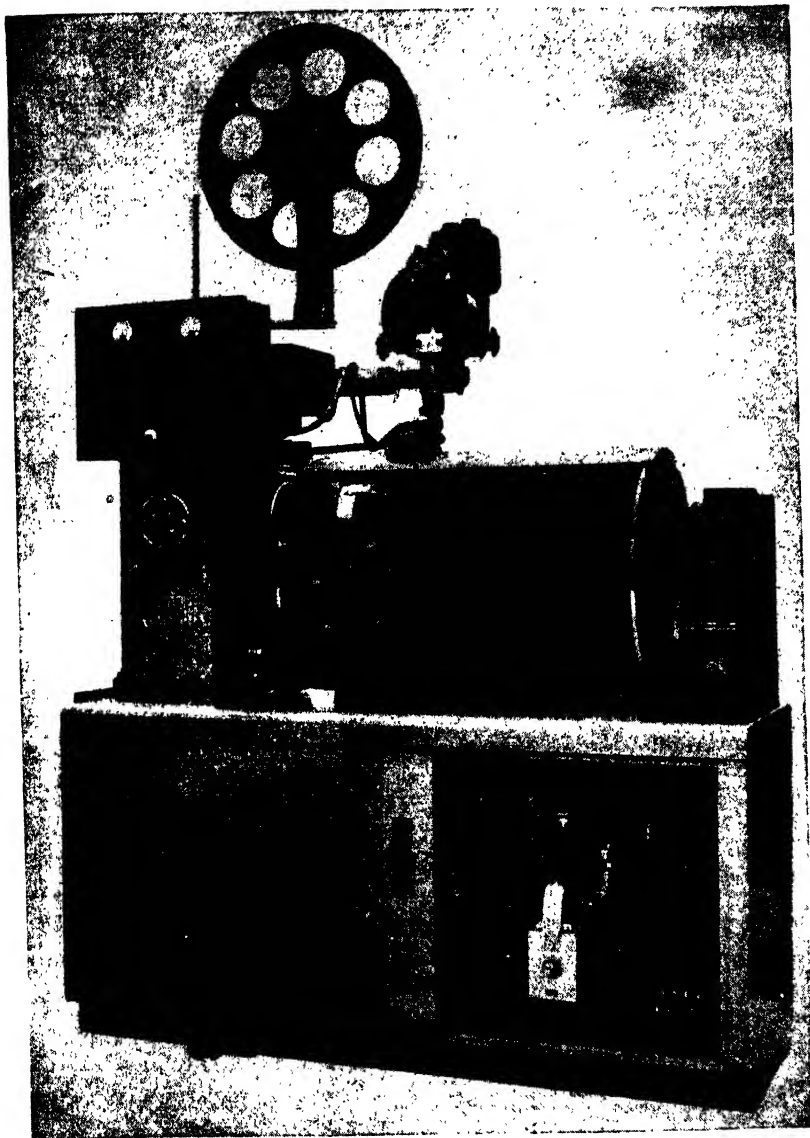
An automatic arc welder using the circuit of FIG. 21.17 to control the rod-feed motor at the top of the machine. The tube panel is at the bottom on the extreme right. (Courtesy of General Electric Company)
